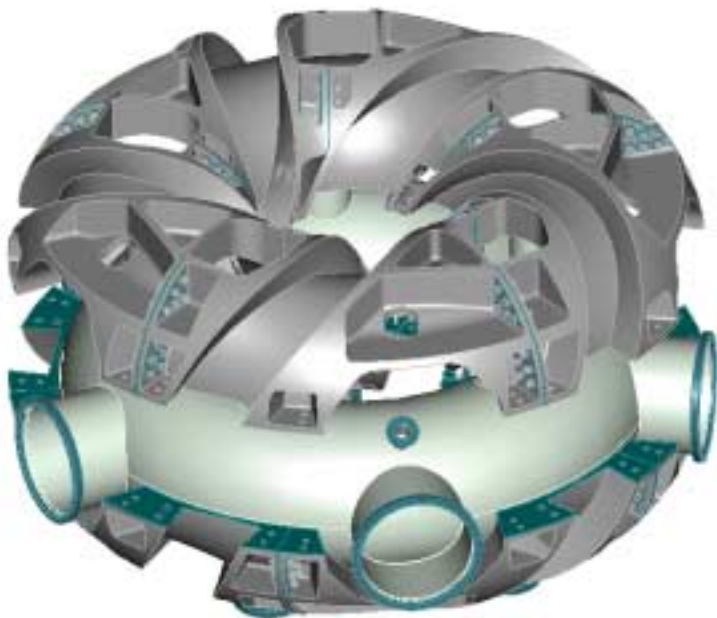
A Sketch of the assembly of the Helical Coil Frame around the vacuum vessel. Five pieces of the HCF will be joined to form the lower section. Next, the vacuum vessel will be lowered in place. The upper part of the HCF will then be constructed, lowered and attached to the lower section.
